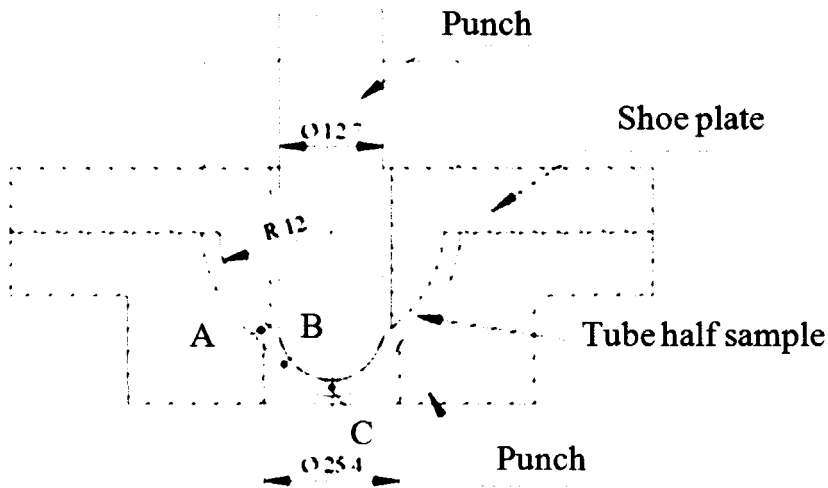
Geometry of a clamped tube sample loaded by a hemispherical punch.
